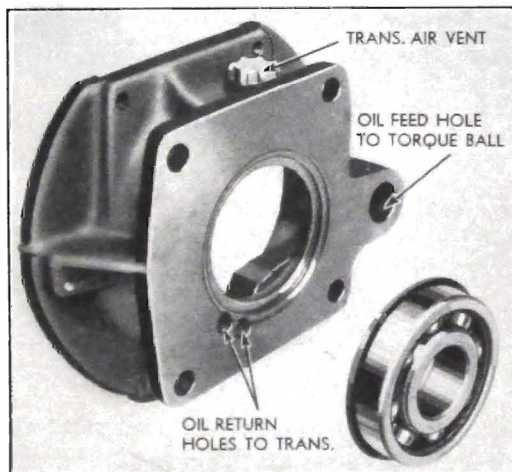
Rear Bearing Retainer—Series 60-70-90
